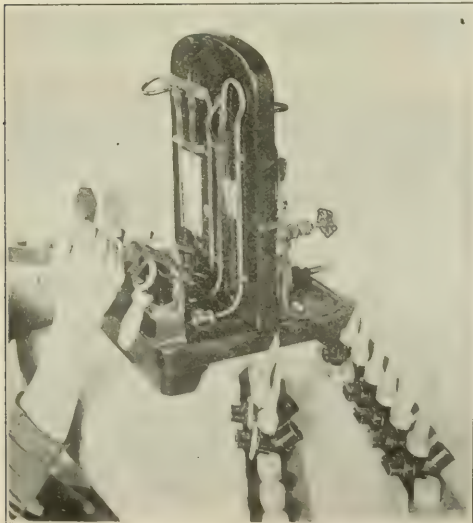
TESTING EXHALE VALVES FOR LEAKAGE
